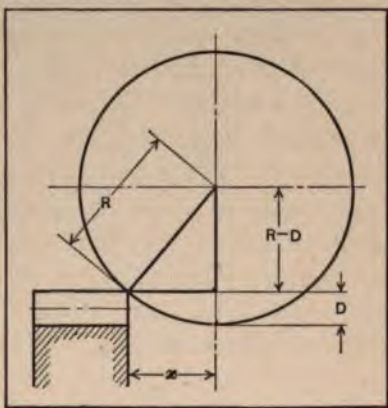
Diagram illustrating Travel of Cutter when Milling Gear Teeth
